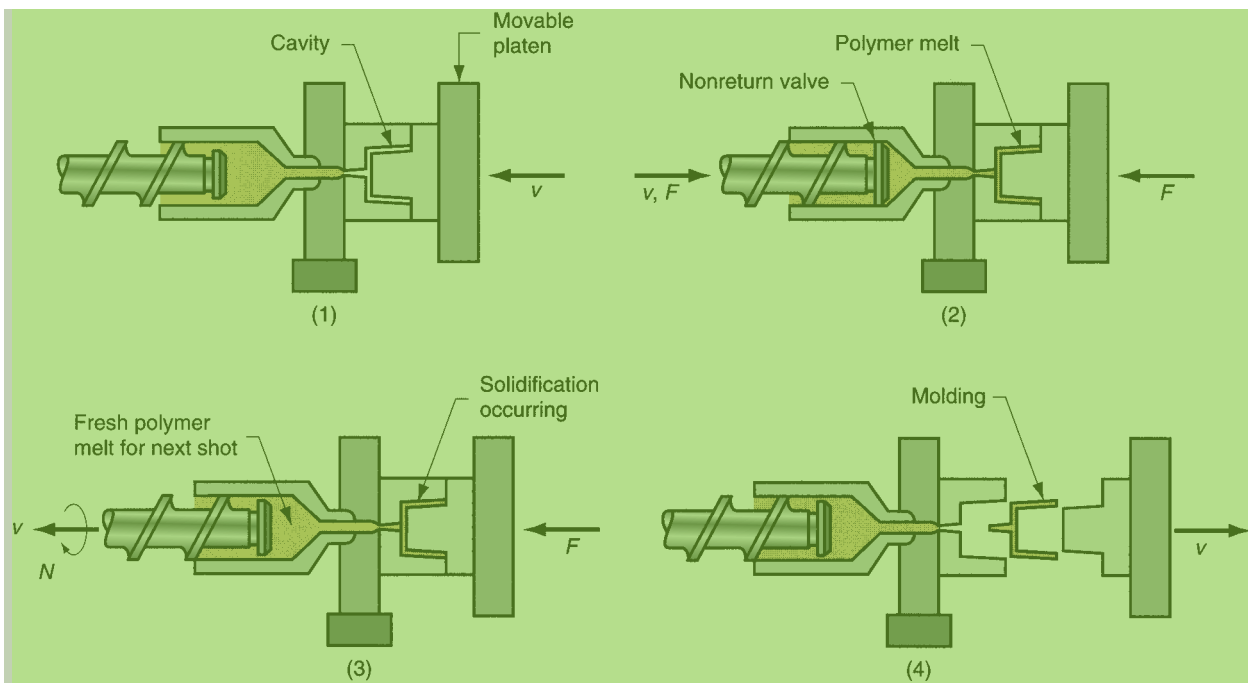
Typical molding cycle: (1) mold is closed, (2) melt is injected into cavity, (3) screw is retracted, and (4) mold opens, and part is ejected.
